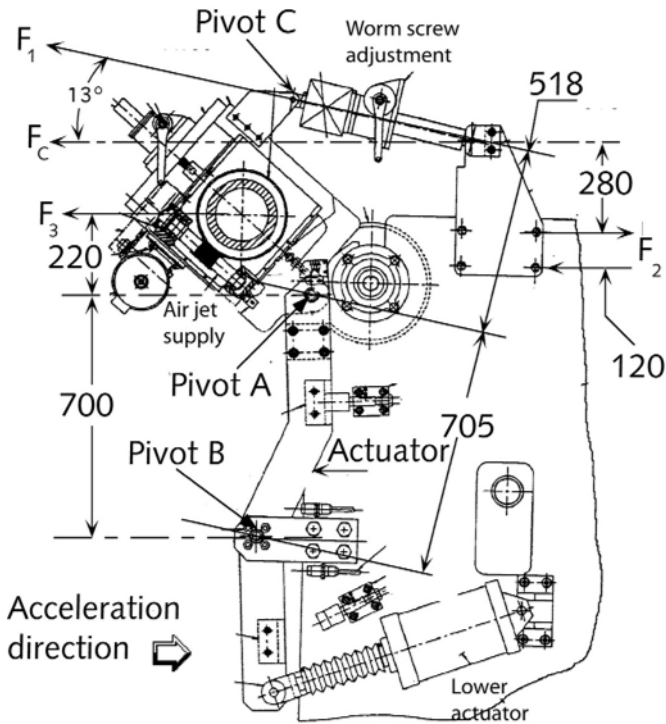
Side view of the airknife coater indicating some of the major features of adjustment to the machine
